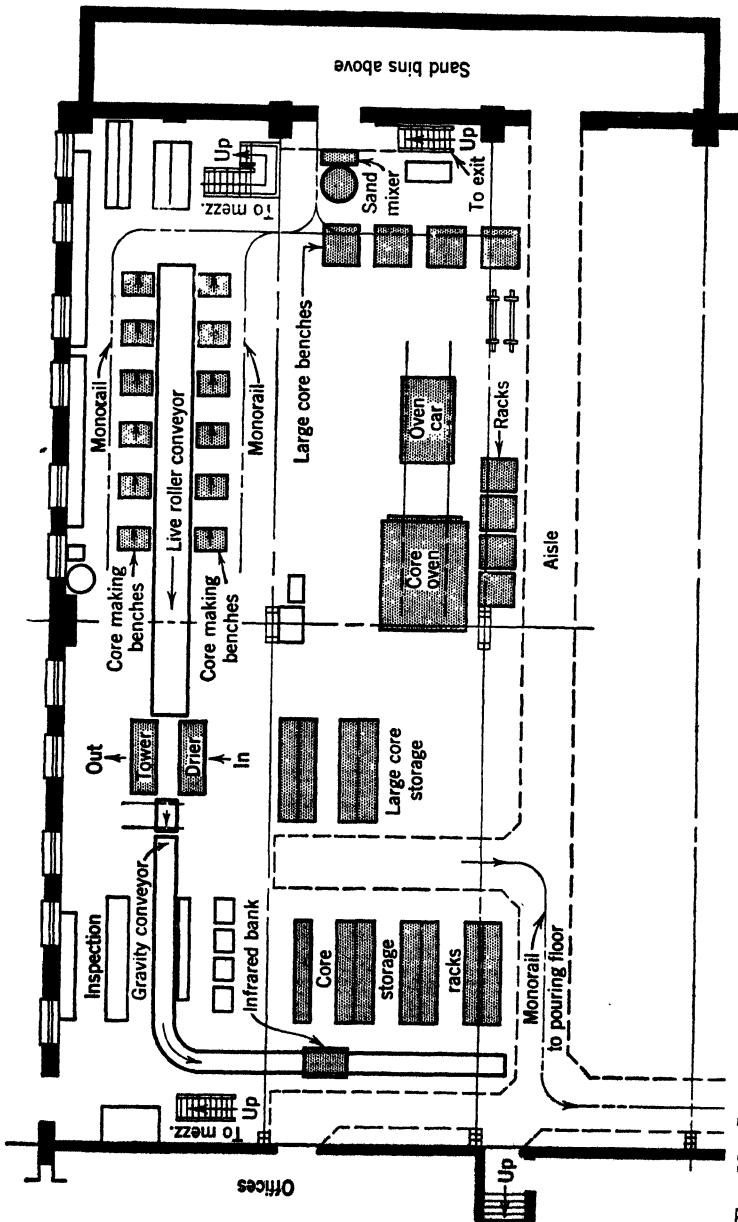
Layout of a core production room showing core handling methods. (Courtesy of *Mechanical Engineering*.)
